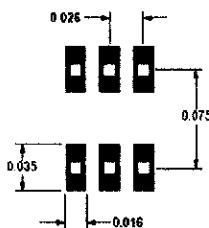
PCB Pad Layout, SOT-363 (dimensions in inches)
